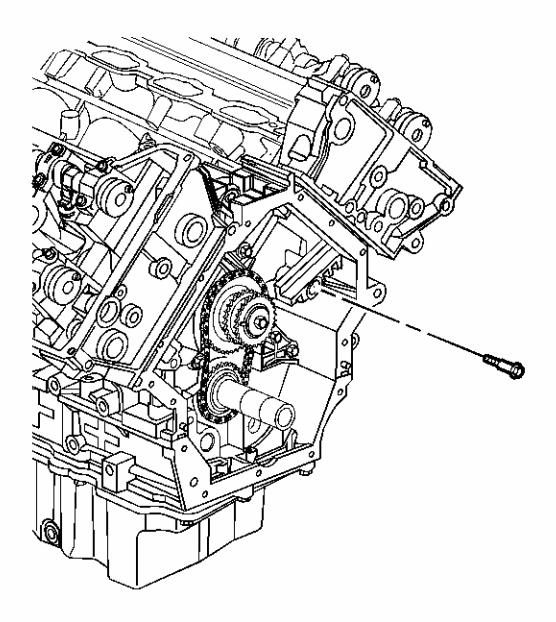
Identifying Lower Left Secondary Camshaft Drive Chain Guide Bolt Courtesy of GENERAL MOTORS CORP.
